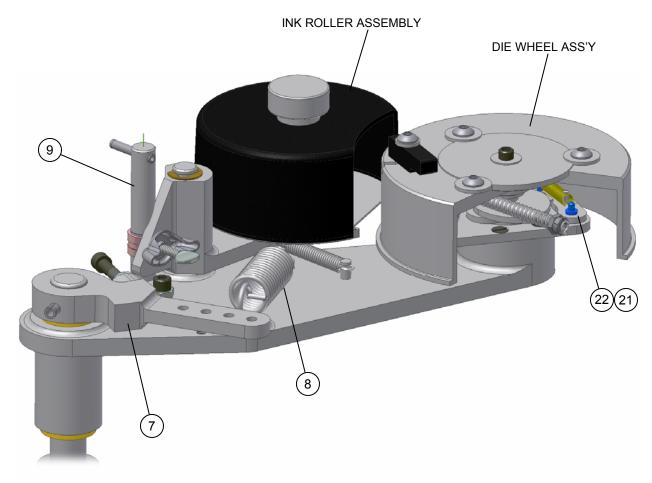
A LEFT HAND (STANDARD FACTORY SET)
